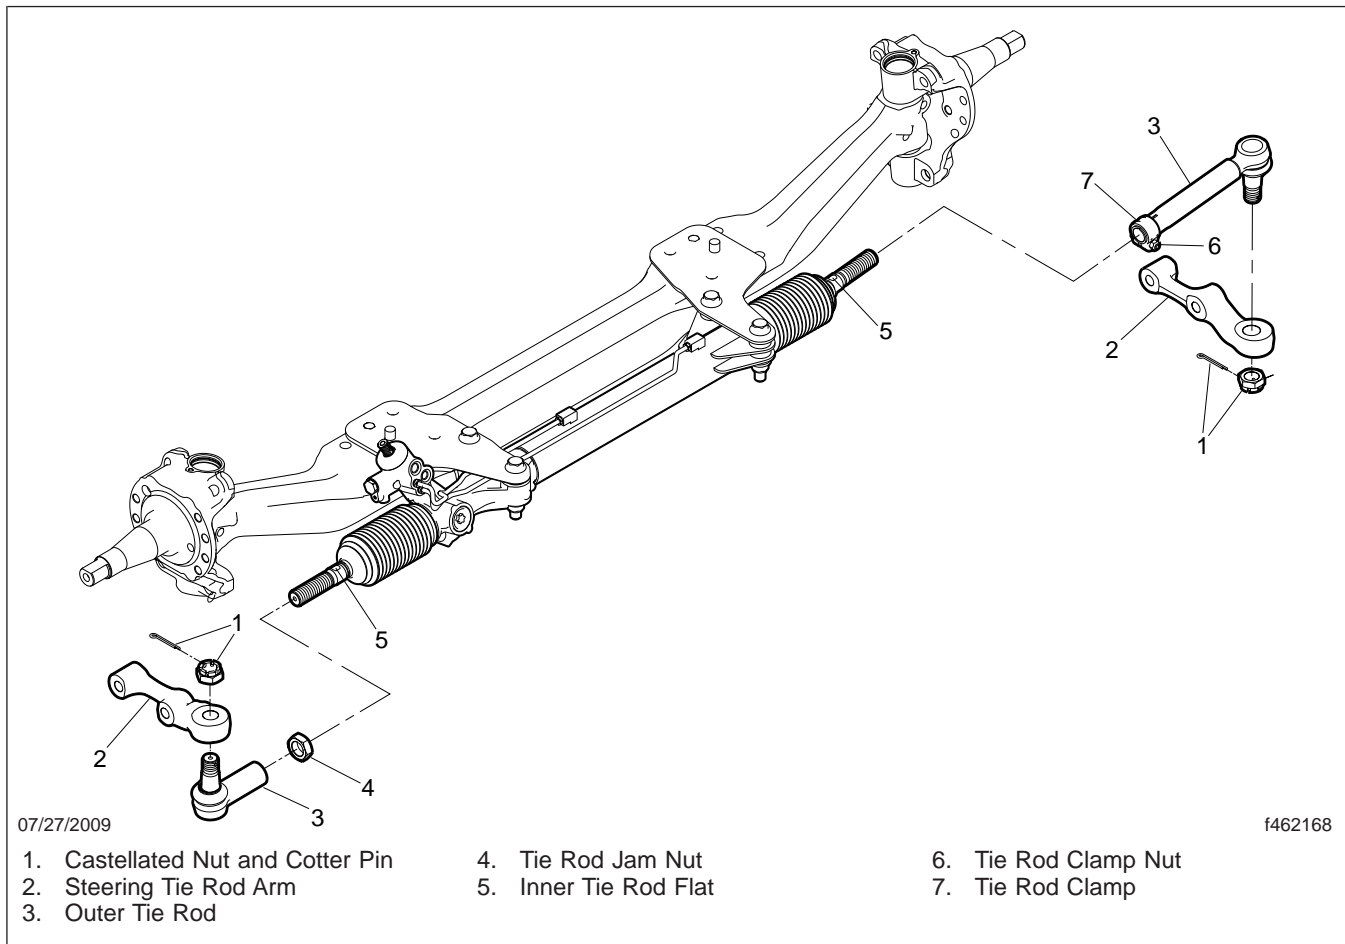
, Rack and Pinion Outer Tie Rod Assembly
